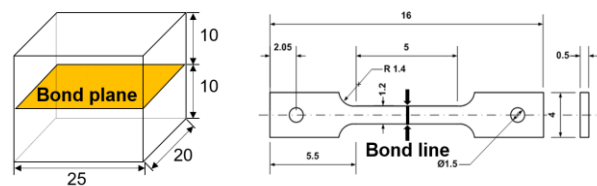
Geometry and dimensions of diffusion bonded blocks and mini sized tensile specimens (in mm).
